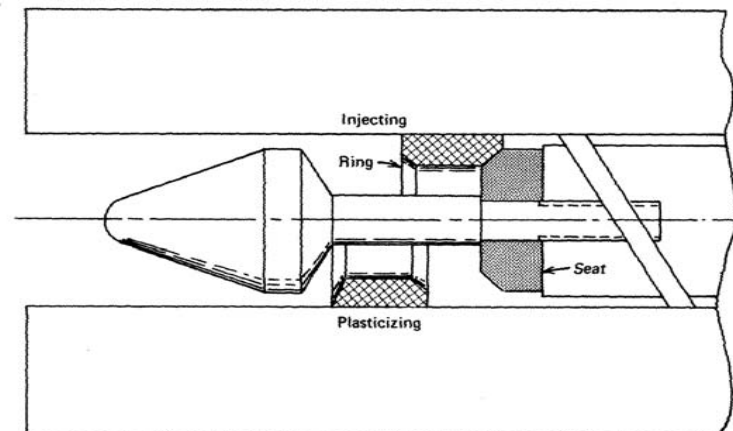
Ring type nonreturn valve for reciprocating screws.
